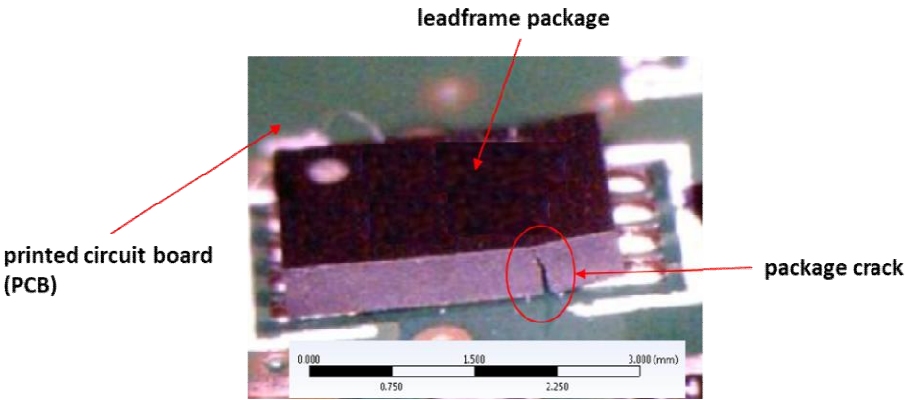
Package crack in a leadframe package mounted on PCB
